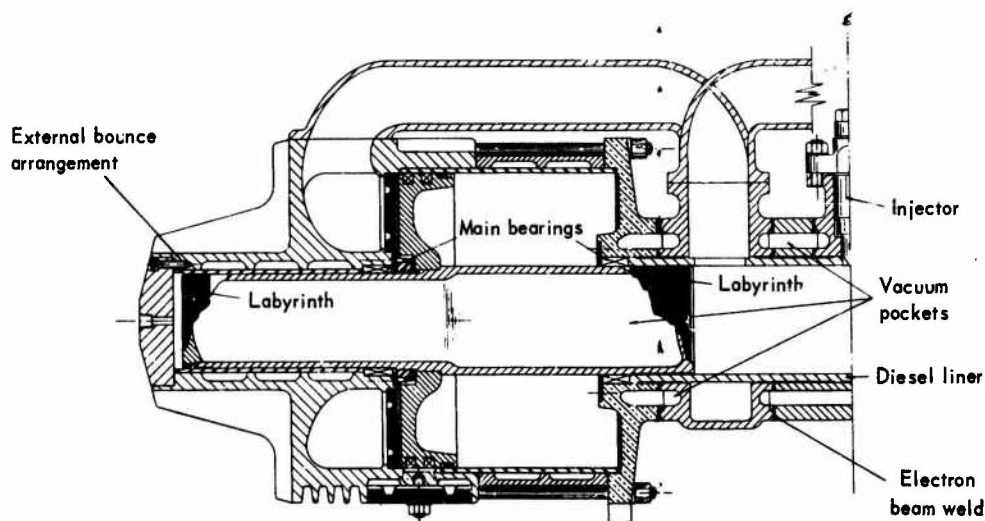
Cross Section of Proposed Hot Gasifier Utilizing Labyrinth Sealing of Pistons
